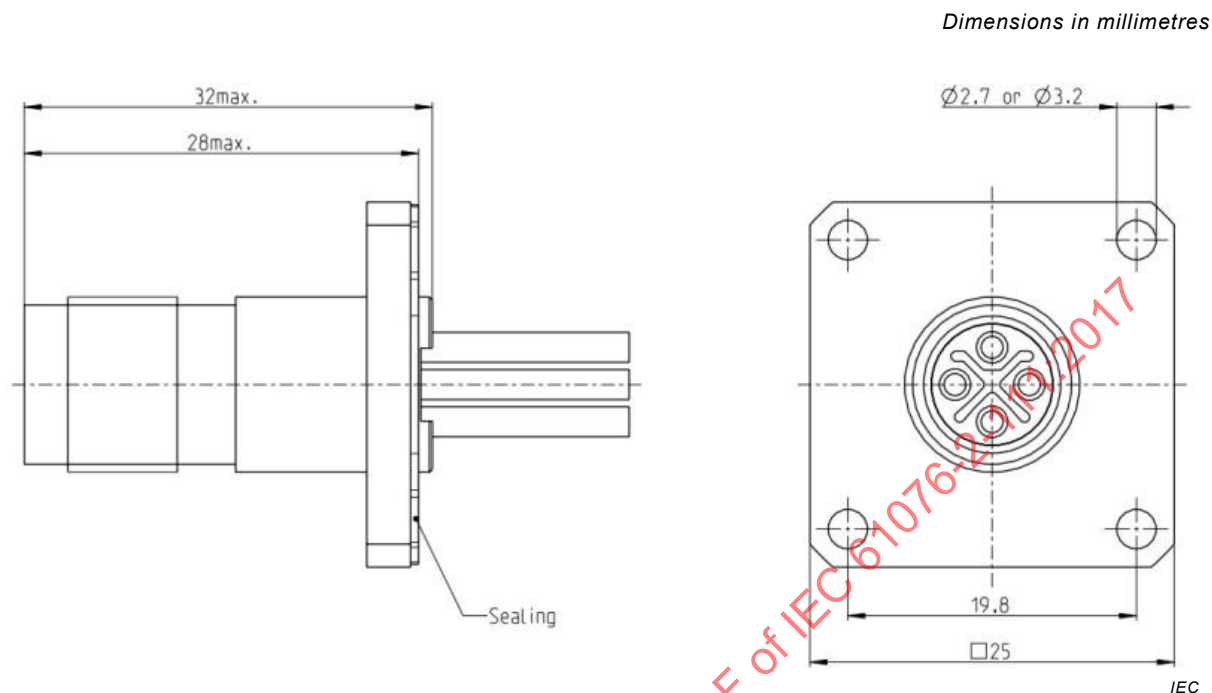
shows a fixed connector, with male contacts, mounting with thread M12 × 1 and a square flange 25 mm and front mounting.
